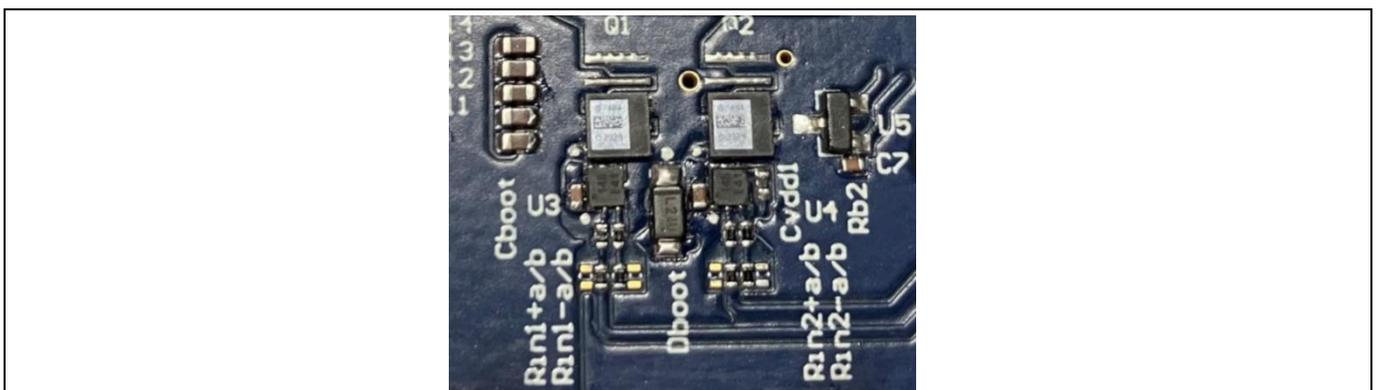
Reworked board with IGB110S10S1 assembled instead of IGC033S10S1
